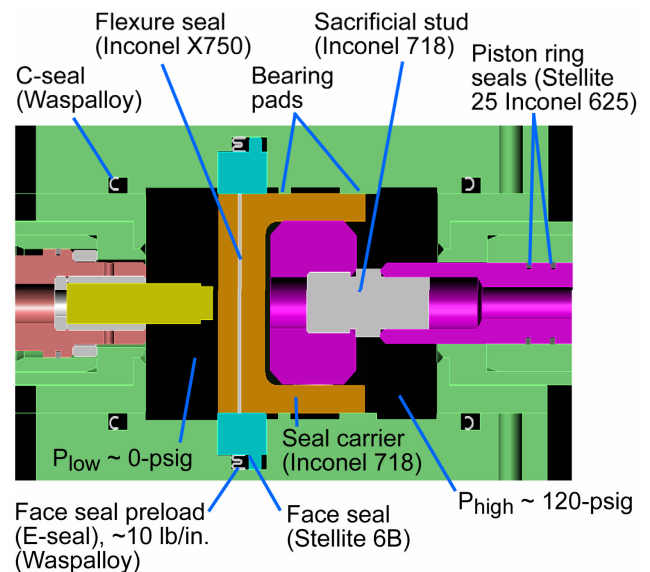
Chamber detail showing seal carrier and adjacent face seals with E-seal preloader, actuator rod piston ring seals (2 places), chamber cover C-rings (4 places), the materials used in construction, and chamber high and low pressures.
